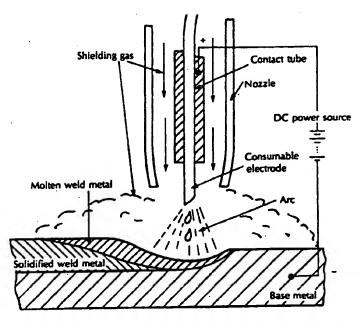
Schematic of the gas-metal arc welding (GMAW) process showing torch, weld and electrical hookup (From *Joining of Advanced Materials* by R. W. Messler, Jr., published in 1993 by and used with permission from Butterworth-Heinemann, Woburn, MA.)
